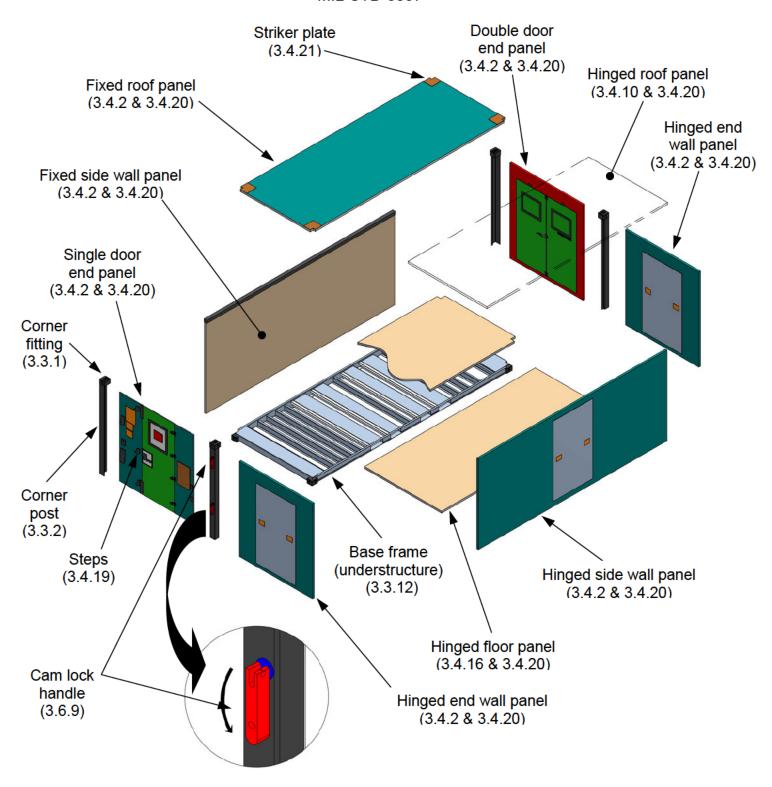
Typical one-side expandable ISO shelter (exploded view)
